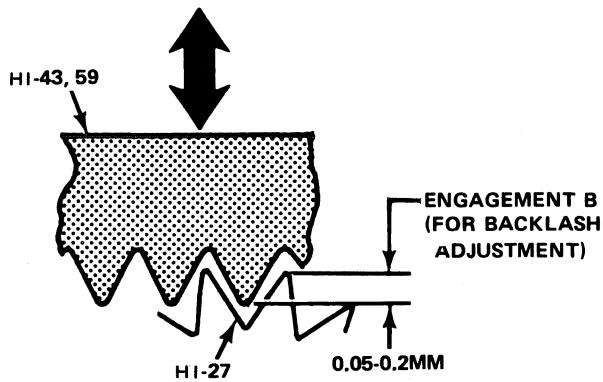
BACKLASH ADJUSTMENT, BEVEL GEAR (HI-43, 59)
